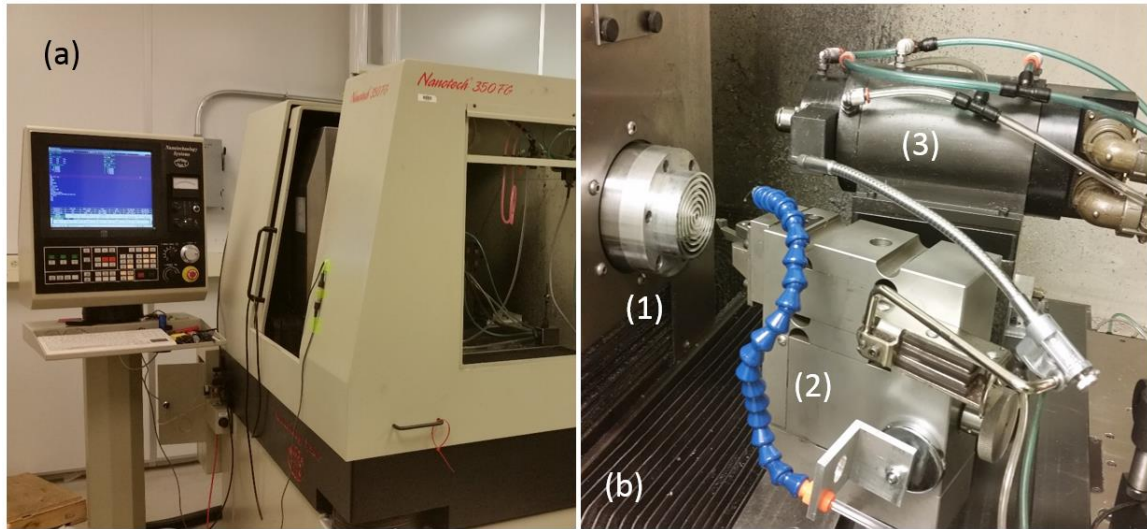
(a) Moore Nanotechnology 350 Freeform Generator (b) view of work volume showing (1) main spindle/C axis, (2) toolpost and turning tool, (3) auxiliary micro-milling/grinding spindle.
